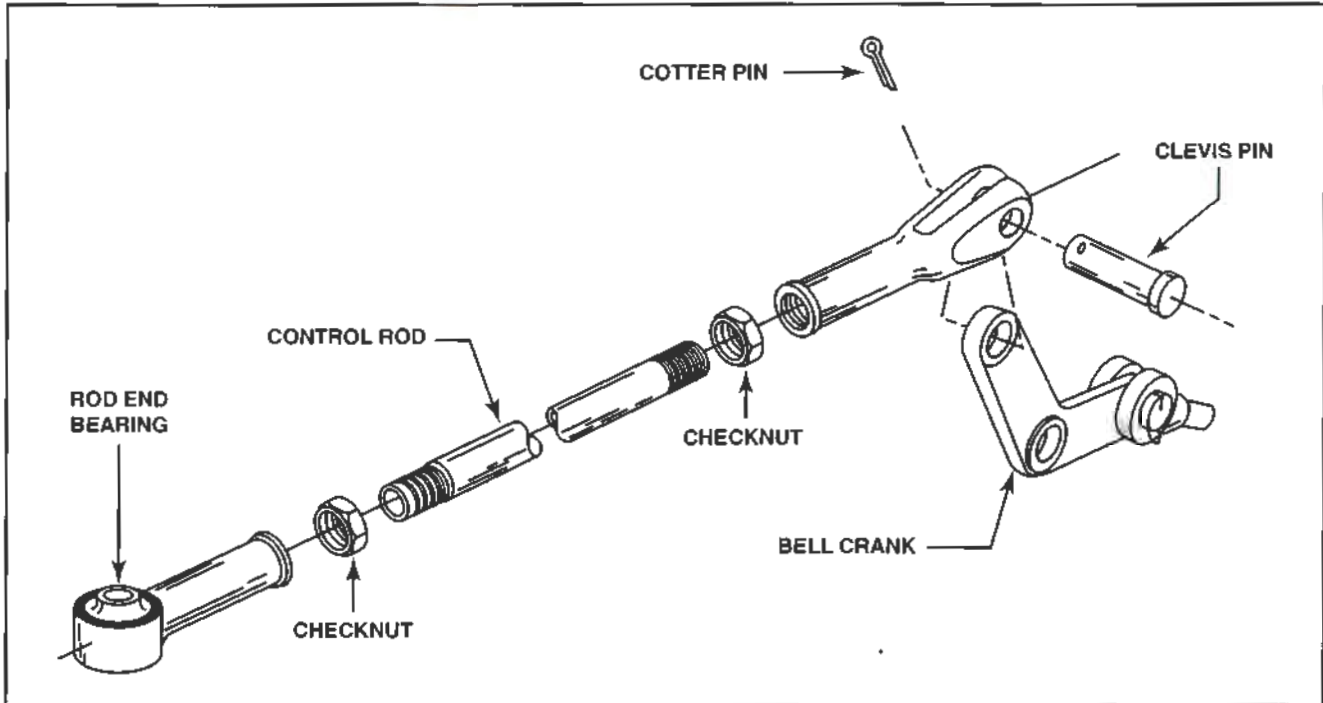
A typical control rod has a clevis pin attached to one end and a rod end bearing attached to the other end. To prevent damaging a control rod, it is best to remove it completely from the aircraft before removing the engine.
